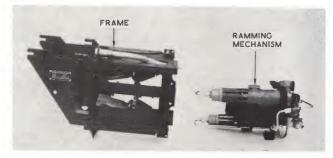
Loader Frame and Ramming Mechanism With Attached Parts
